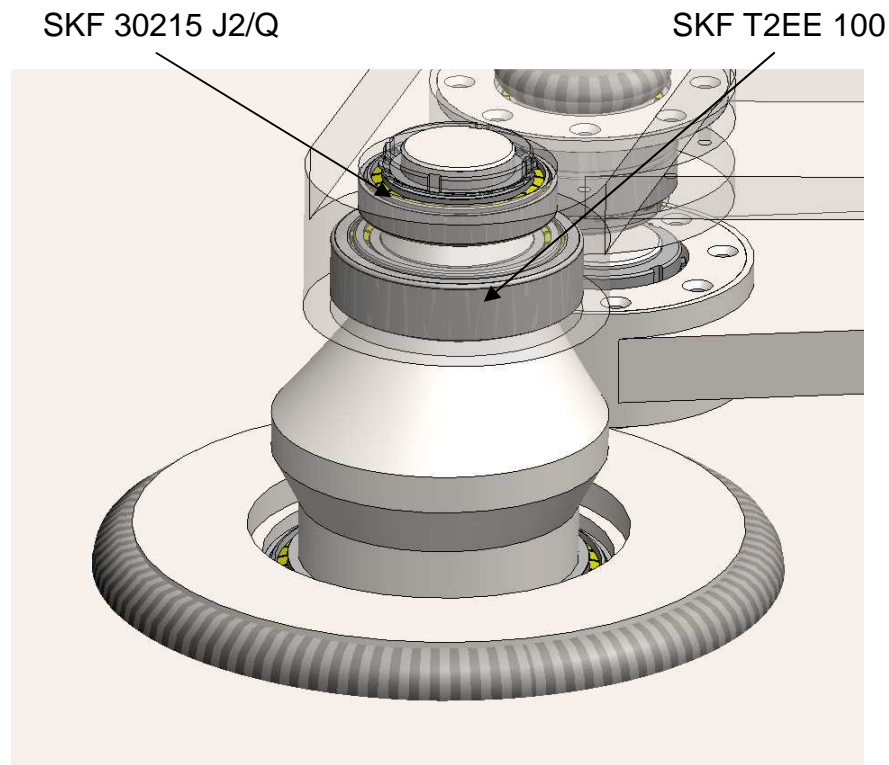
Tapered roller bearing arrangement for bearing location 3
